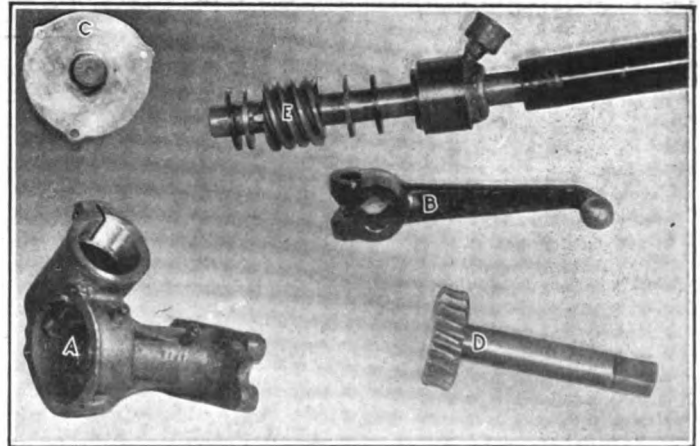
Steering details: A, box; B, drop arm; C, cover; D, sector and worm; E, shaft
